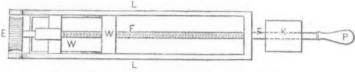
Top View of Brake Lever Shown in Fig. 1.
